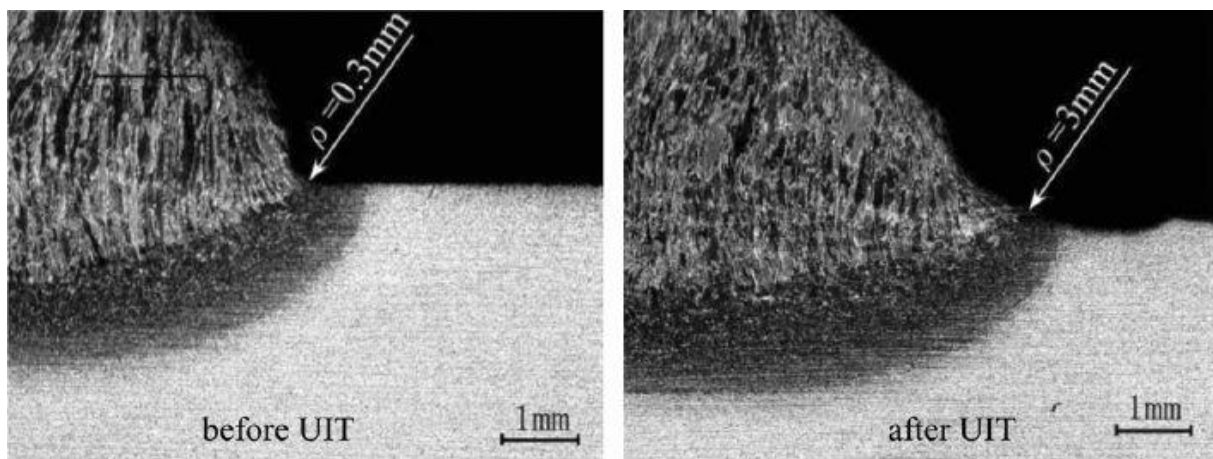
UIT at welded toe³⁷⁾.
